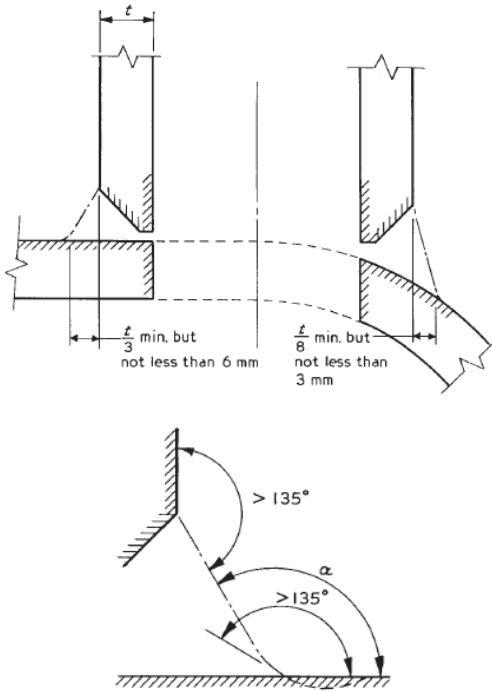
Figures are applicable for the Ratio of stub OD to pipe OD of 2/3 or less. The bottom figure depicts the toe detail. If the weld makes an angle α less than 135° at either toe, the weld is to blend with minimum radius of 5mm.
